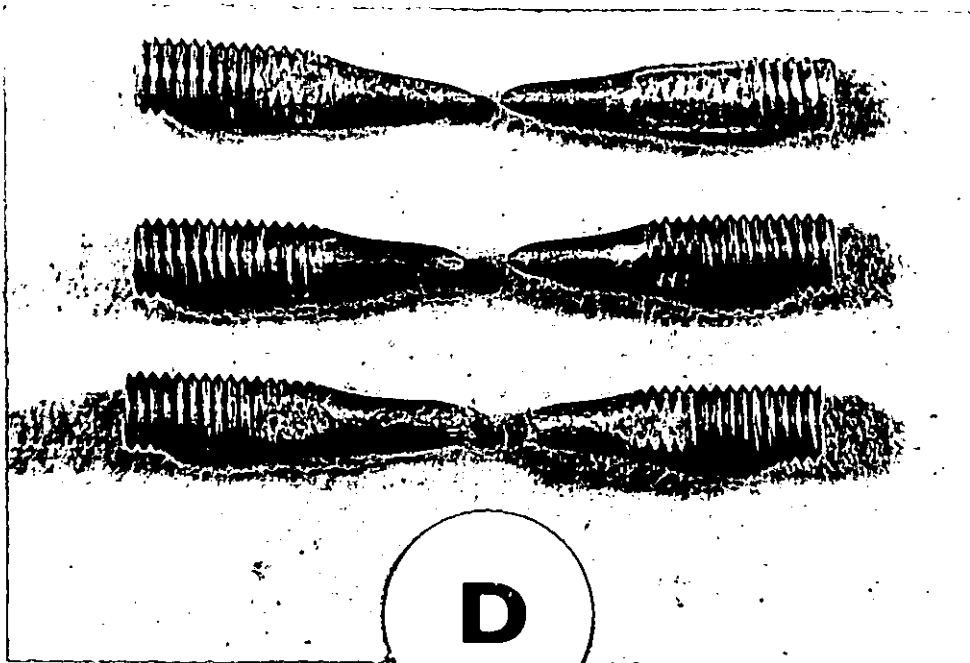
(c). Specimens quasi-statically fractured at 400 °C. All three specimens, show 'cup and cone' fracture surfaces.
